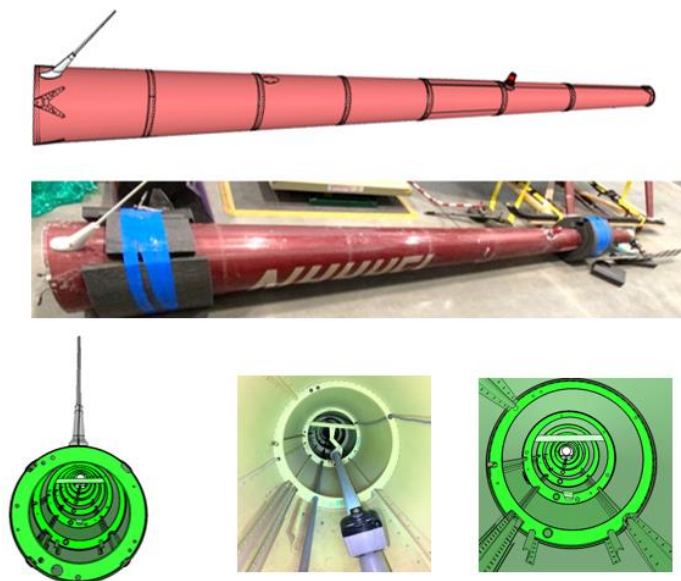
Part 27 Rotorcraft CAD showing the internal structure vs. physical test article.
